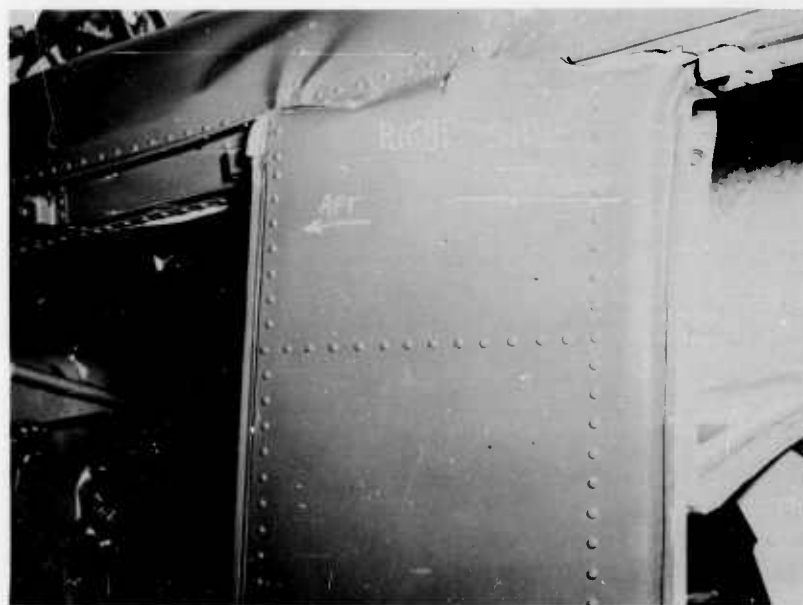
Side view showing failure of right vertical support at upper attachment and shifting of overhead cabin structure.
